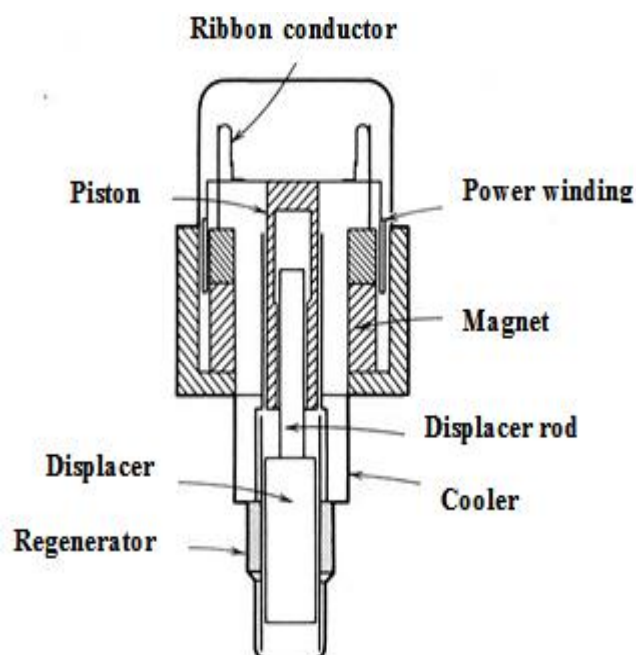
Sun power 100 W free piston Stirling engine (section view)[6]
